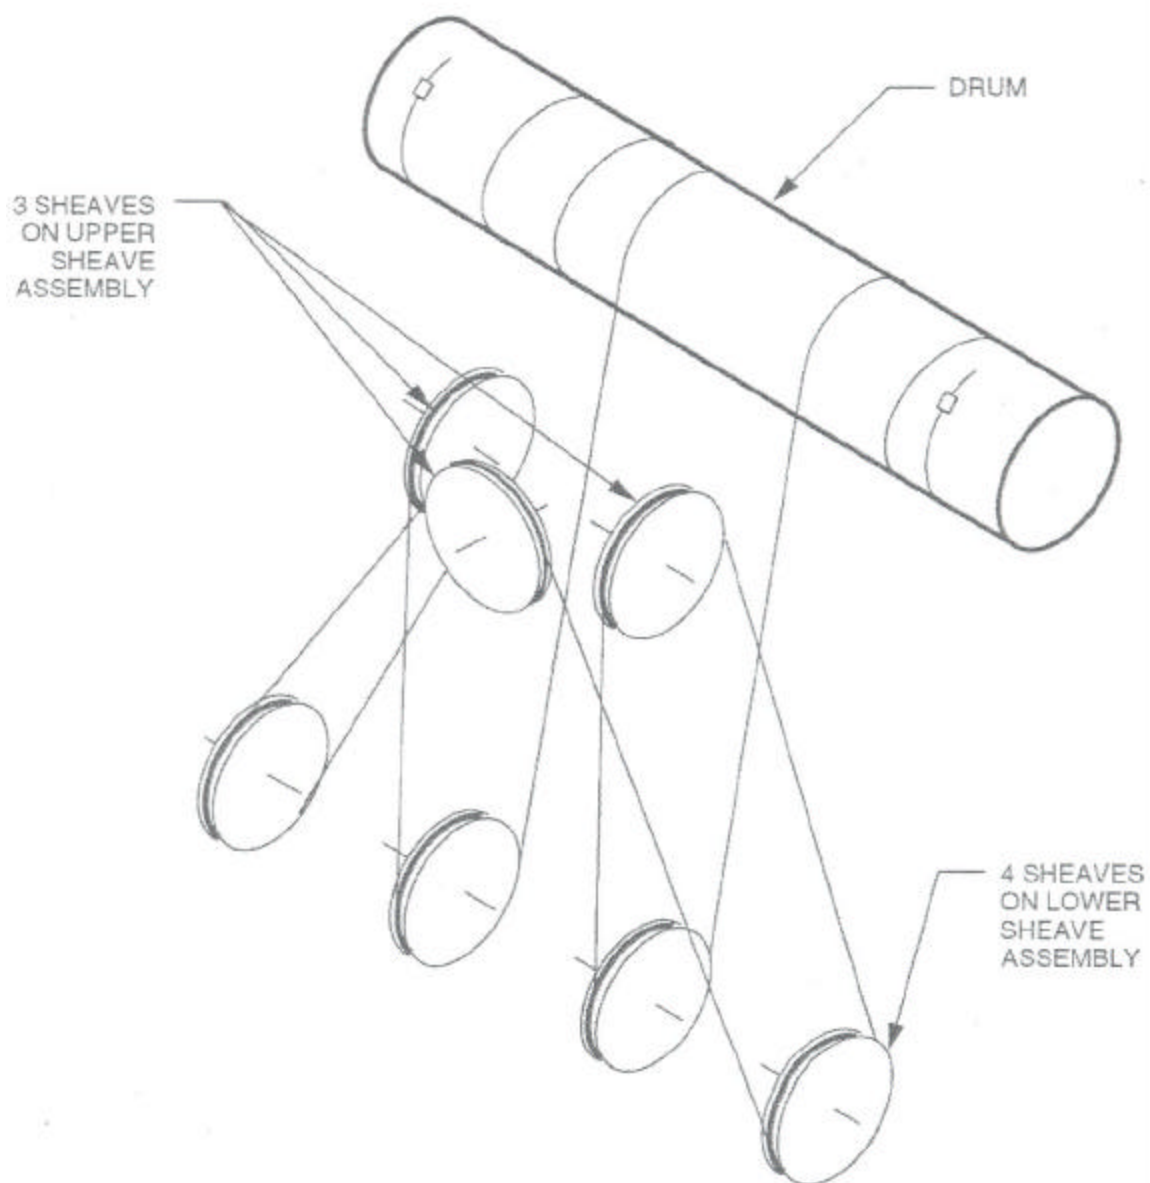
30-Ton Bridge Cranes, Rope Reeving Assembly
